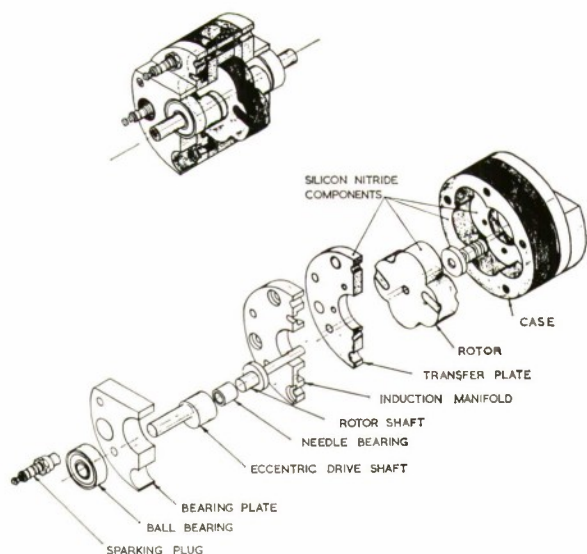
Rotary piston engine employing silicon nitride rotor, stator and side plates to improve wear, resistance and sealing.
